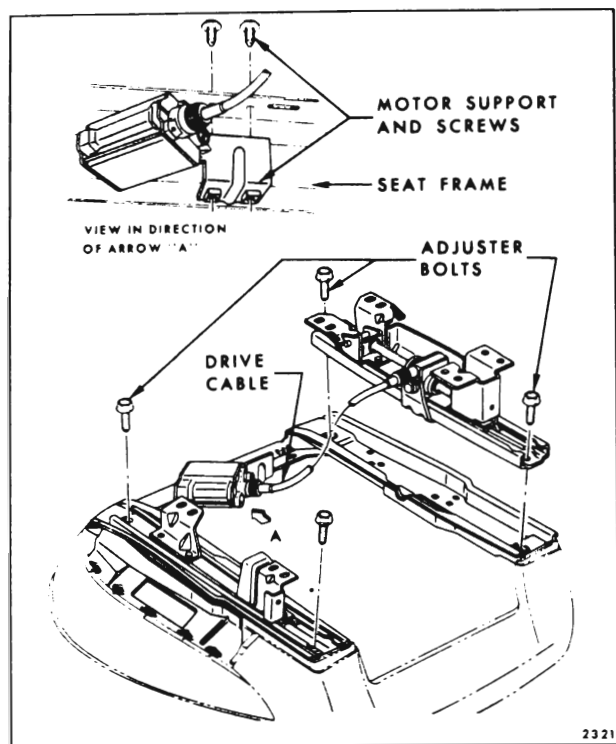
Power Horizontal Bucket Seat Adjuster Removal
